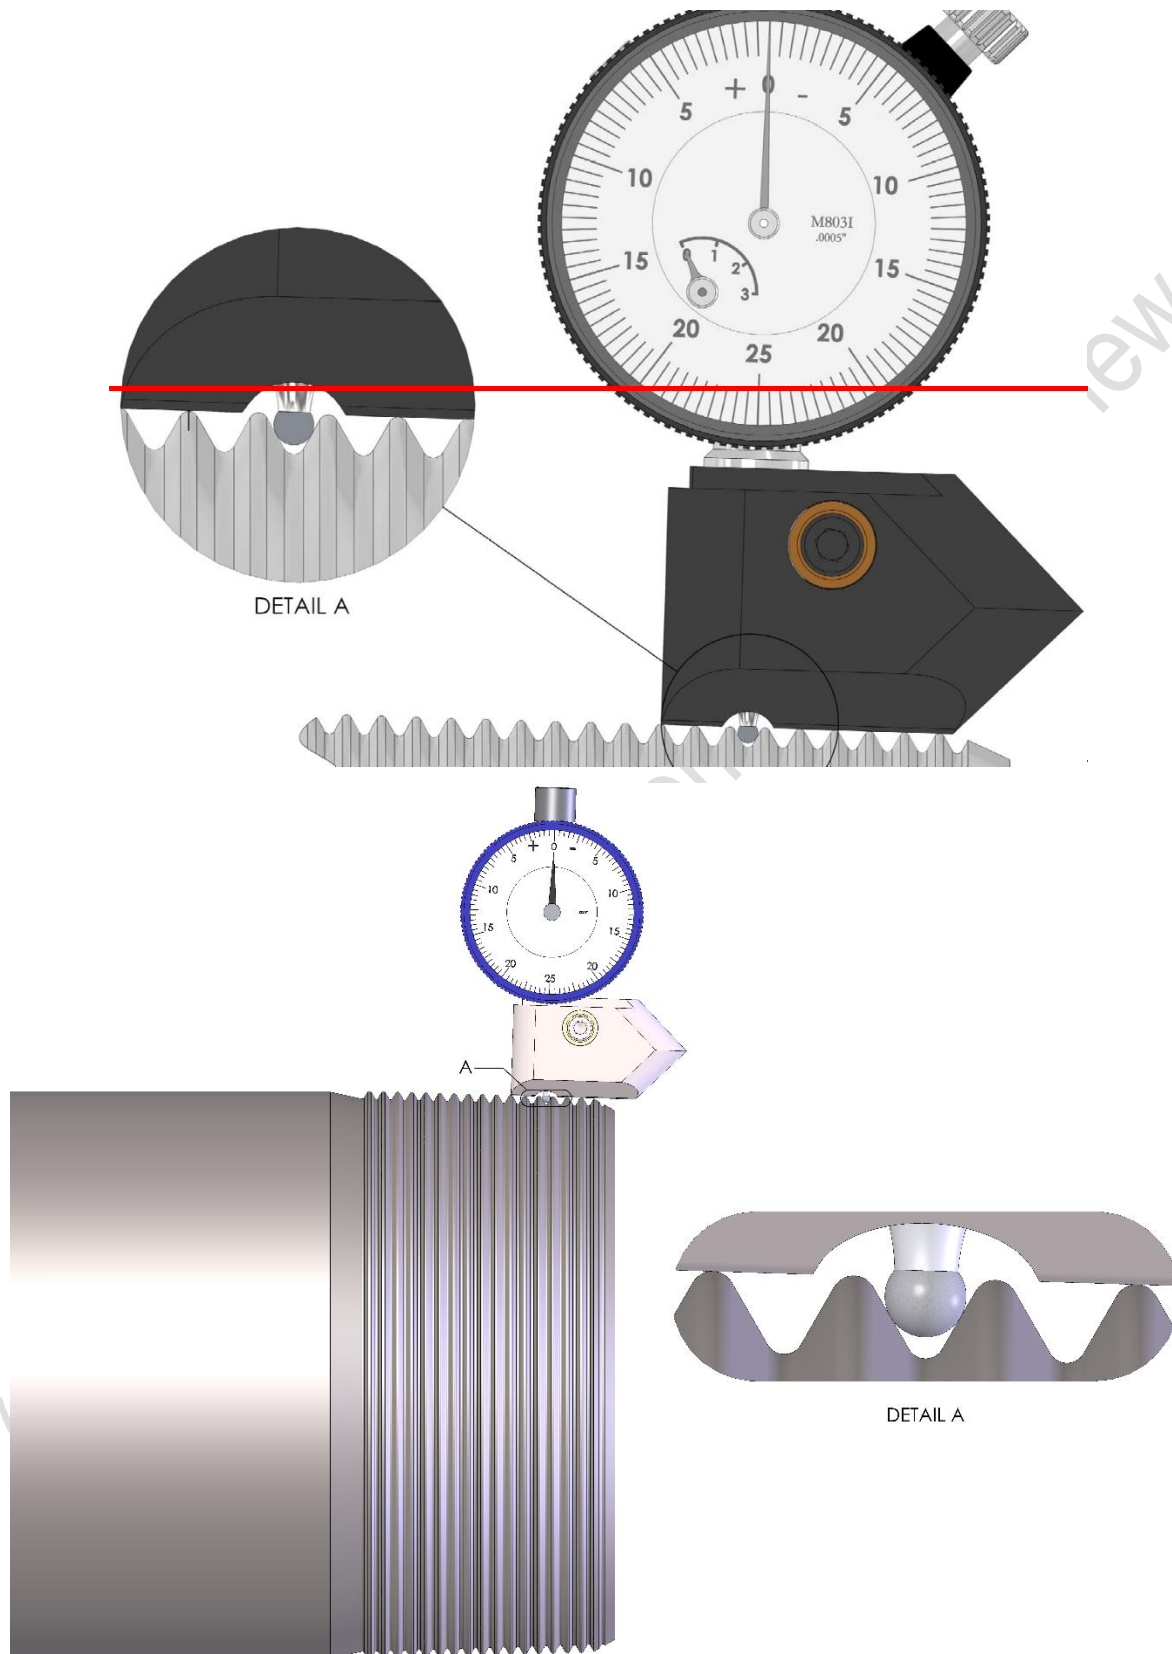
External Addendum Gauge on Pin Threads (Round Thread Addendum Gauge)
